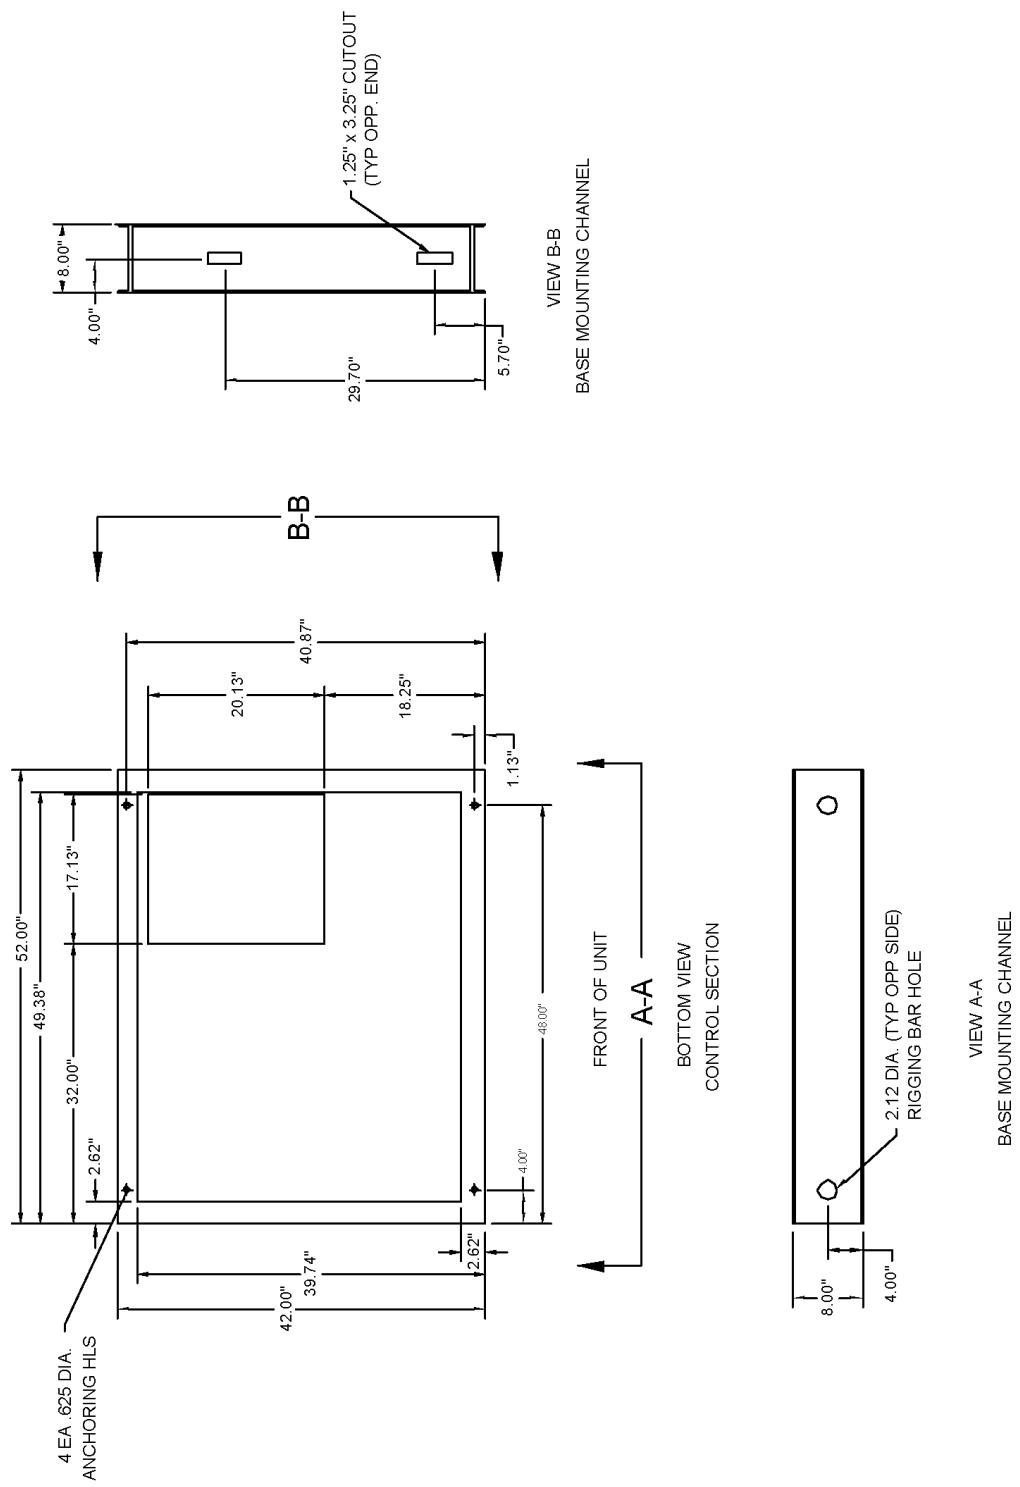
Base mounting details, 1000kVA, Single- and Multi-Module, rectifier and inverter sections
